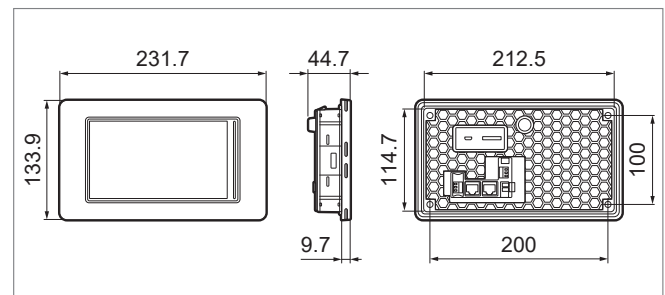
Dimensional drawing and borehole diagram for the system operator terminal (dimensions in mm)
